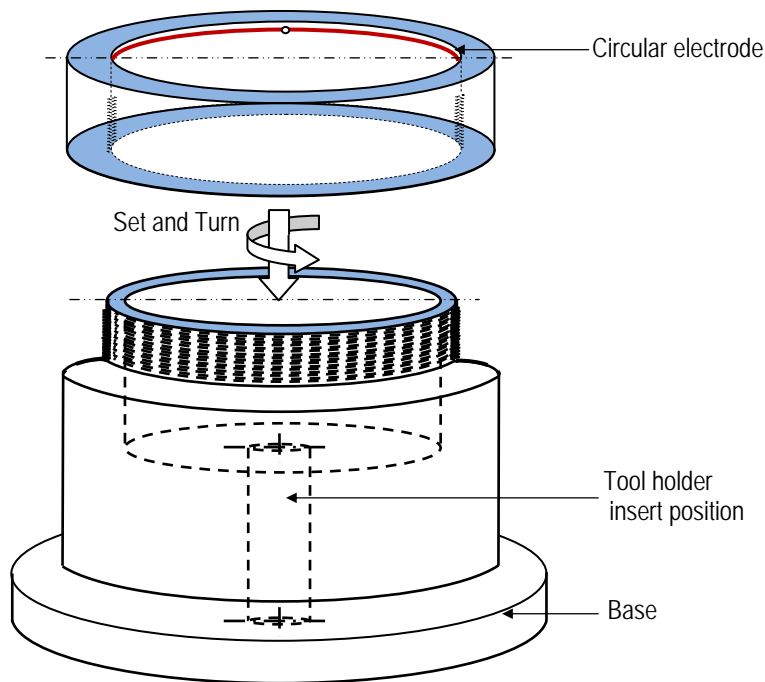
The workpiece (microtool specimen) holding fixture during tool fabrication.
